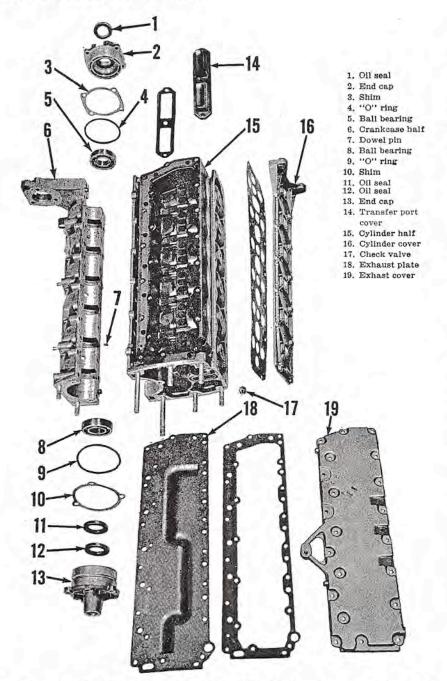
Exploded view of crankcase and associated parts used on six cylinder models. Four cylinder models are similar.
